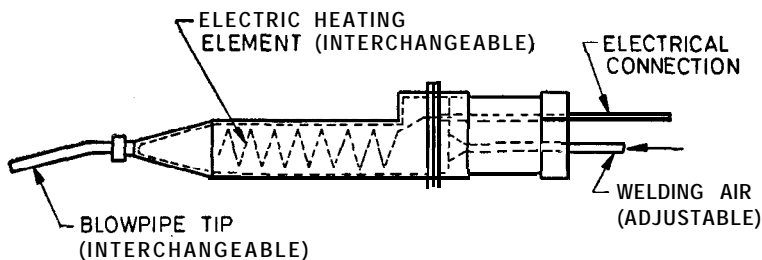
ELECTRICALLY-HEATED HOT GAS WELDING EQUIPMENT
